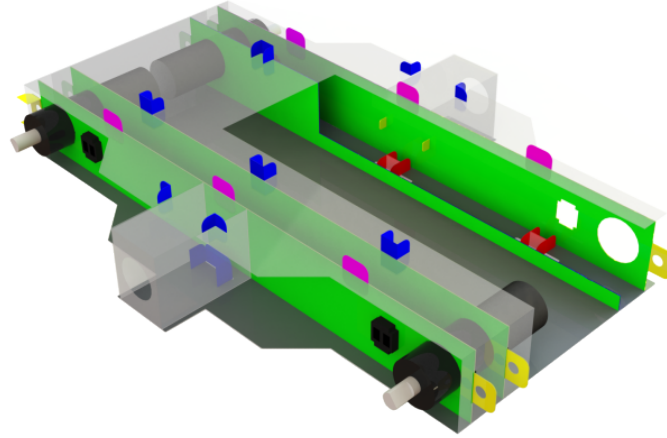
A sectional view of MinIAQ’s main frame with tight fit motor housing using a pair of parallel T-folds and an IR sensor housing on the outer T-fold next to motors. ●Green: T-shaped folds. ●Red: Double-sided coupled locking tabs to fasten T-fold faces. ●Yellow: T-fold end extension fasteners to restrict torsional twist and sliding dislocations (Holes are used to temporarily insert pins during assembly). ●Pink: T-fold top extension fasteners to restrict torsional twist and sliding dislocations. ●Blue: U-shaped lockable fasteners to form I-beam like structures from T-folds.
